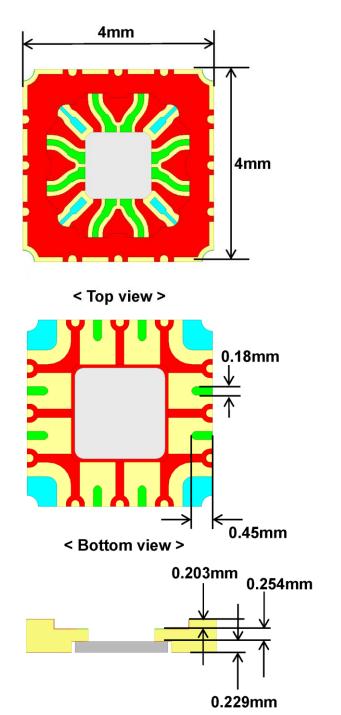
CQFN 24-Pin Package Drawing (All Dimensions in mm)
